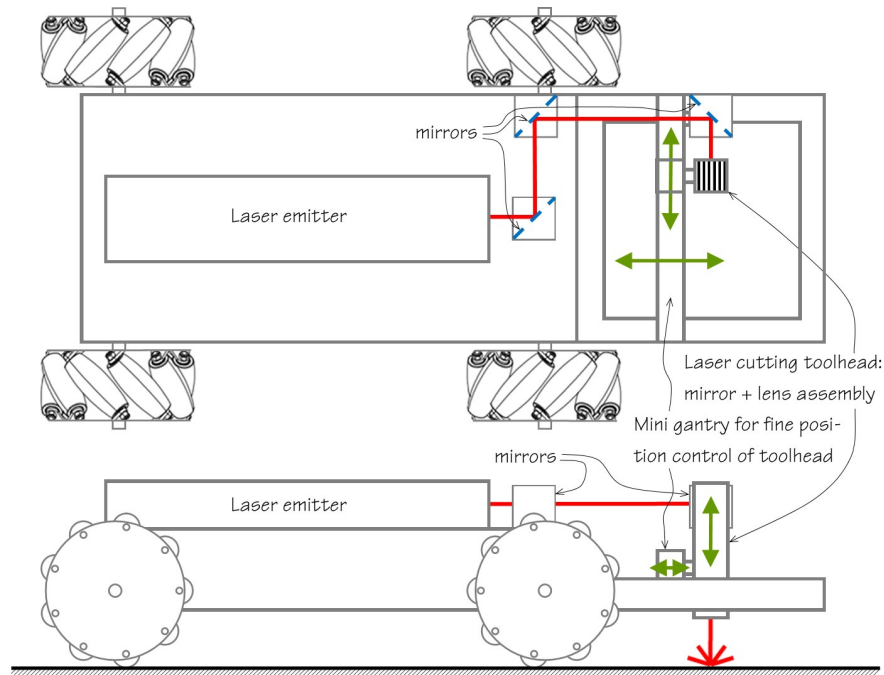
Sketch of a concept of a mobile platform for laser cutting.
